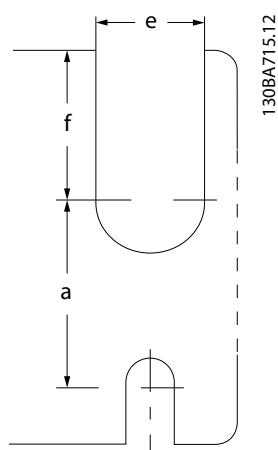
Top and Bottom Mounting Holes (B4, C3, and C4)
